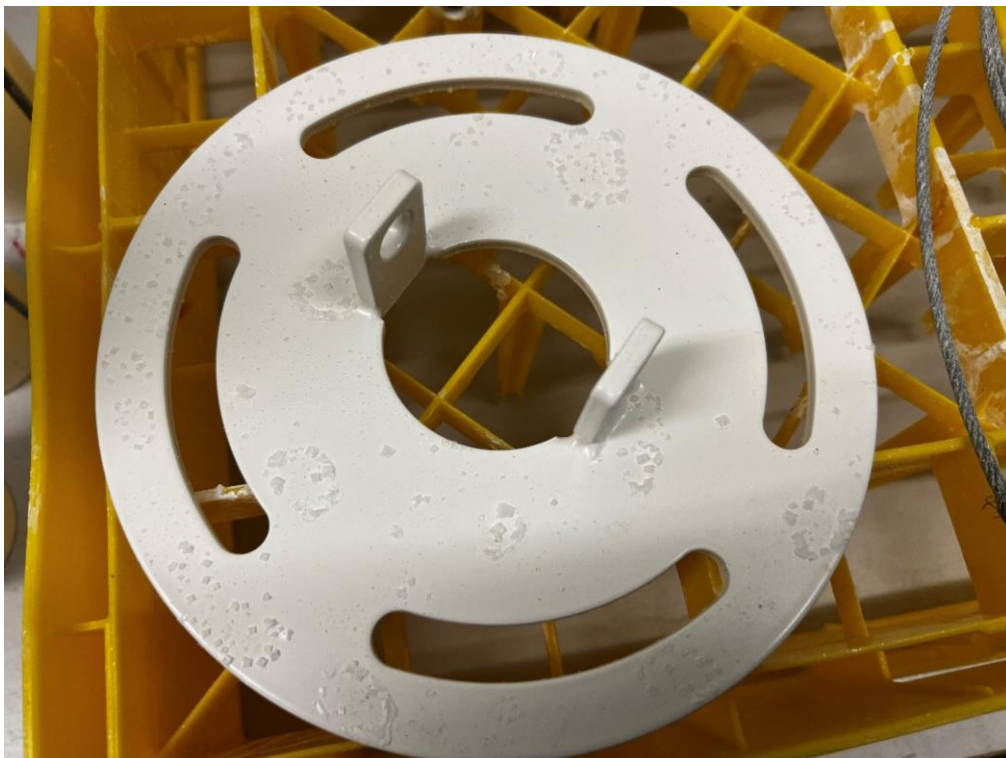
Visual inspection. (Guy wire mount plate, P/N: 20024) no signs of corrosion.
